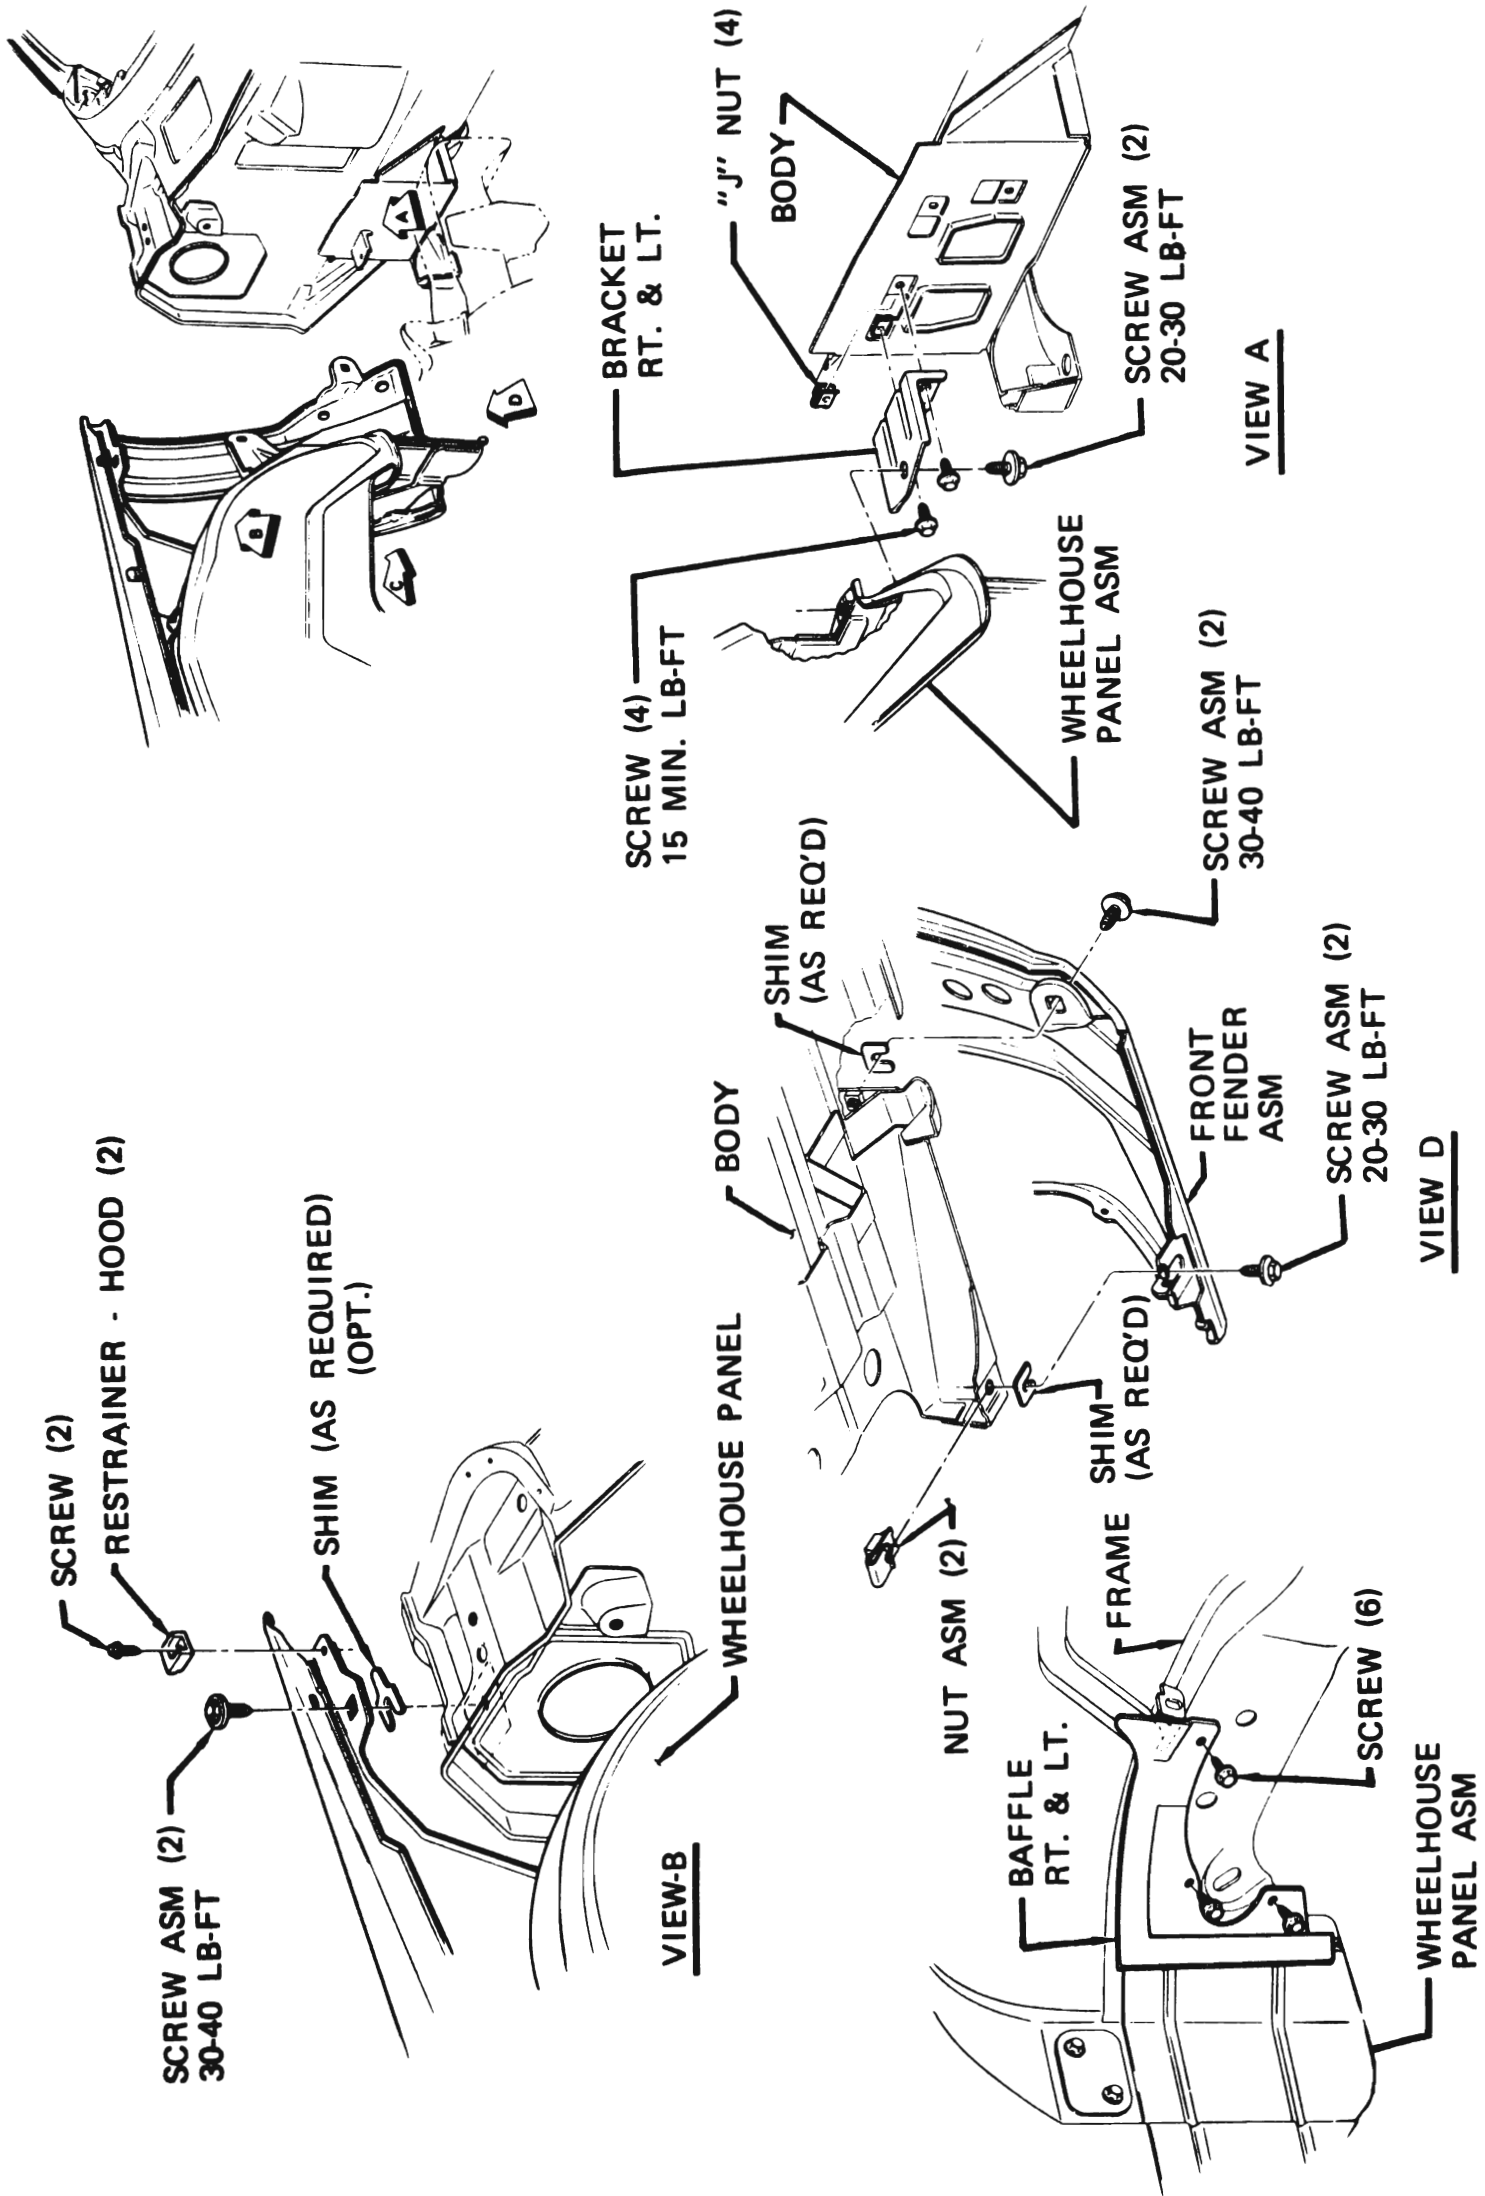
4L-4N-4R-4P-4U-4V Front Fender Assembly to Body
